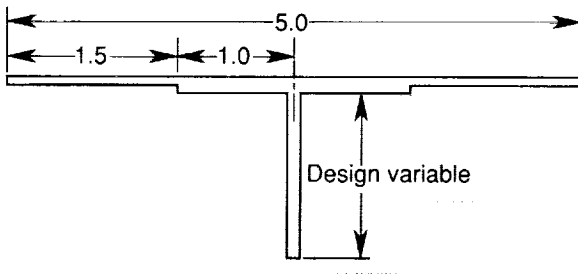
Design requirements on dimensions of cross section for lightly loaded panel. One repeating element is shown. Dimensions are in inches.
